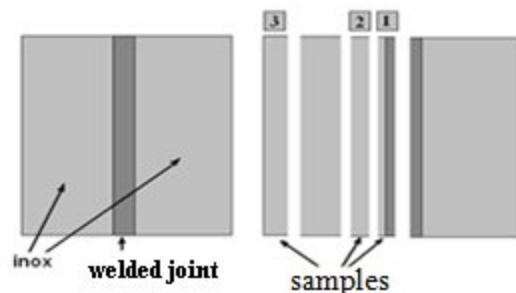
Sketch of the position of samples of working electrodes on the weld.
